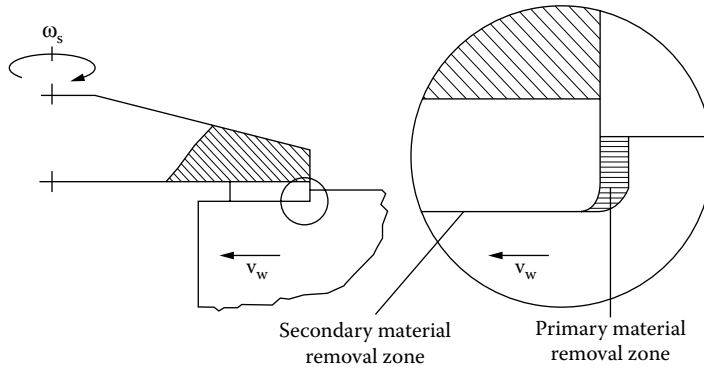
Material removal in vertical spindle face grinding with horizontal feed.
